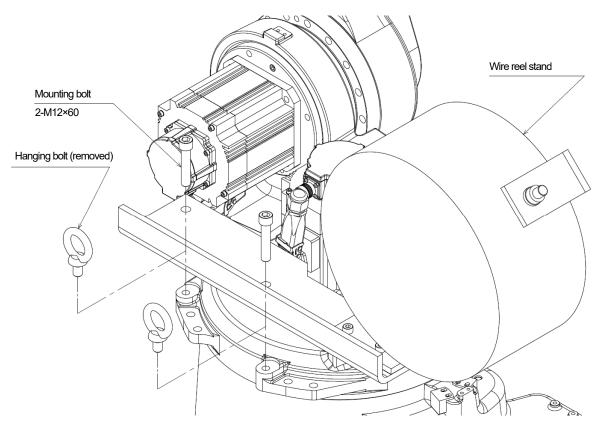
Mounting of wire reel stand for JT1 (BA013N)
